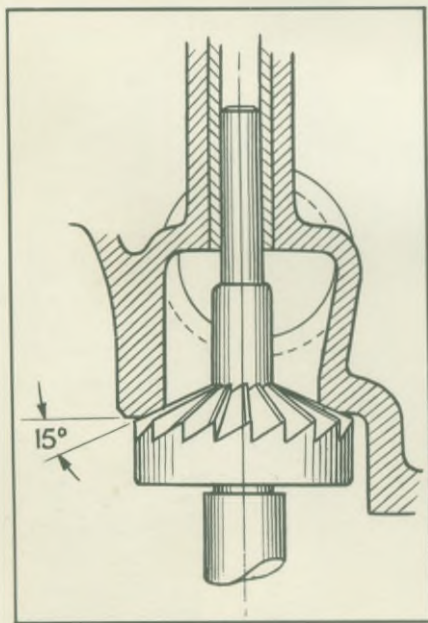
Use of 15° valve seating cutter to provide clearance of gases
